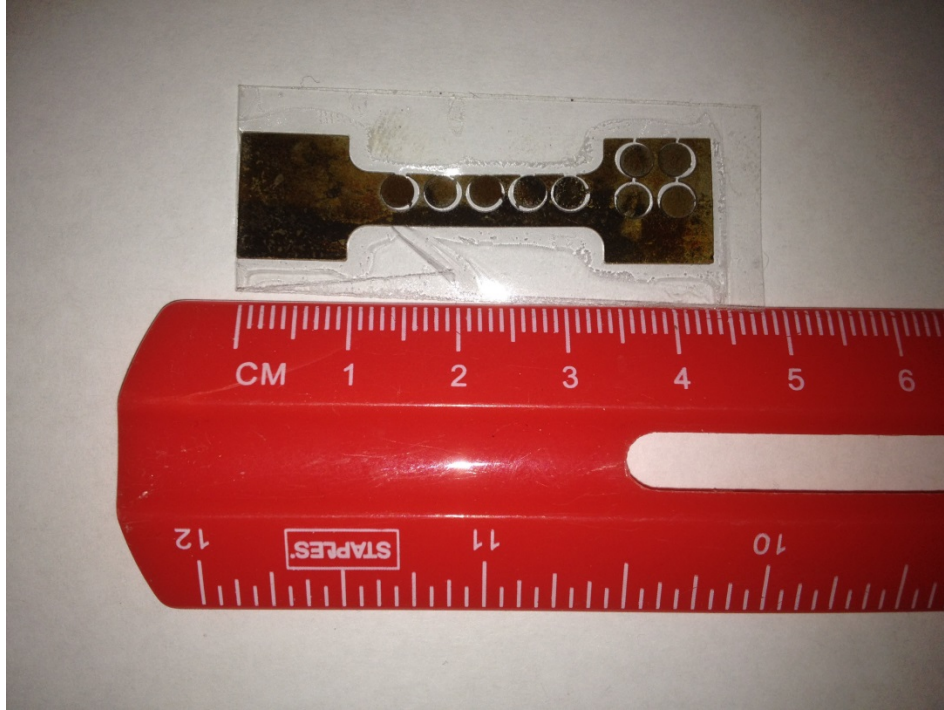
Tensile specimen deformed to the yield point (YP) with 3-mm-diameter disks cut from the gage length and shoulder using electro-discharge machining (EDM).
